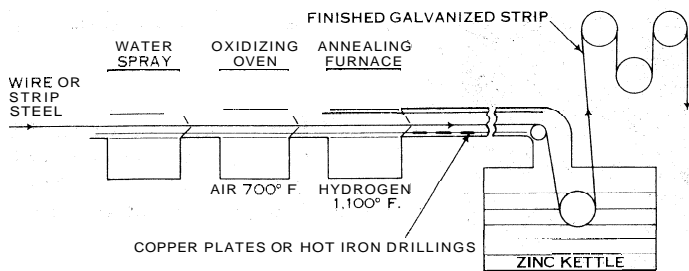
SCHEMATIC DRAWING OF ZINCGRIP PROCESS
